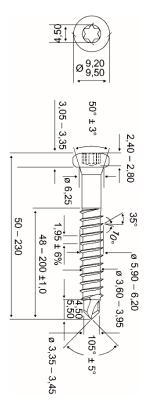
Milletech Itech 6,1 T25 for fixing in steel sheets
